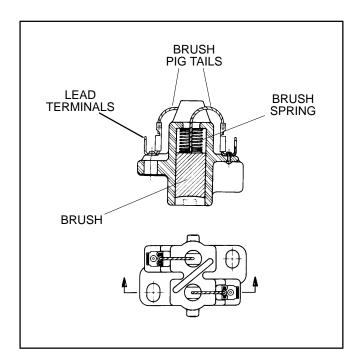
BRUSH BLOCK ASSEMBLY
